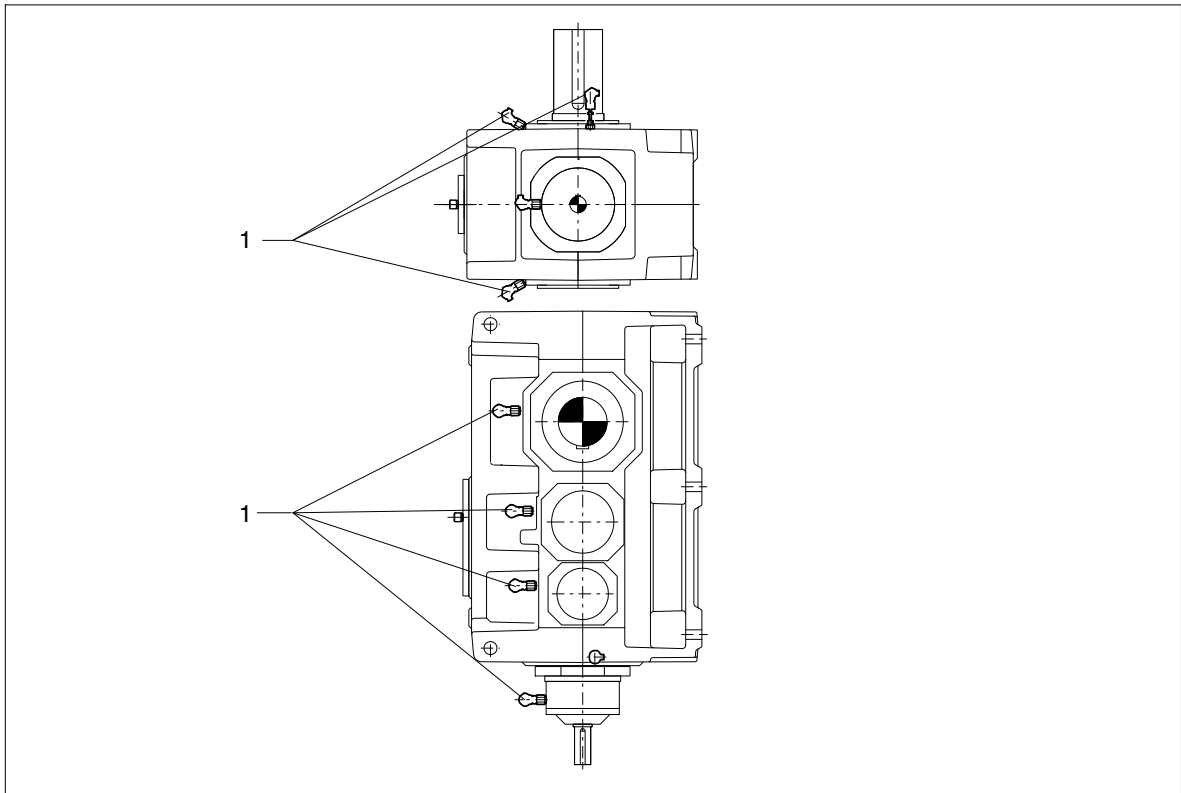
Bearing monitoring by Pt 100 resistance thermometer on gear units of type B3.H
